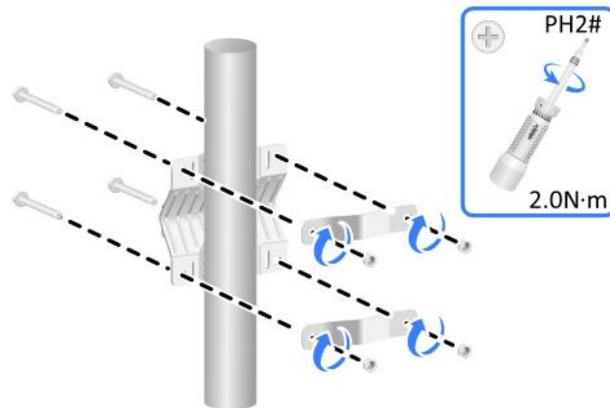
Secure Mounting Bracket and Bracket Clamp
